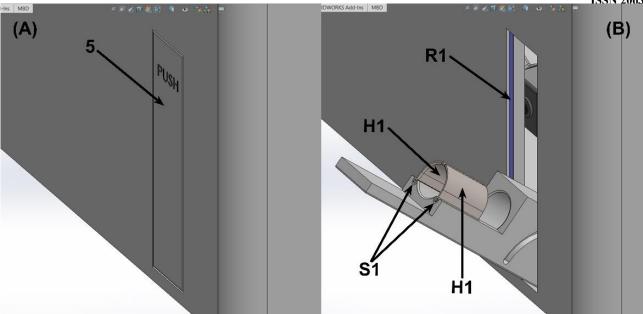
(A)Closed position view, (B) open position view of automatic sample collection tube holder.
